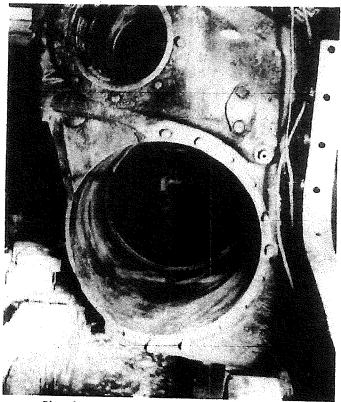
Another view of the C36 class cylinder failure. Note the use of firebricks to build a small furnace under the cylinder prior to welding.
